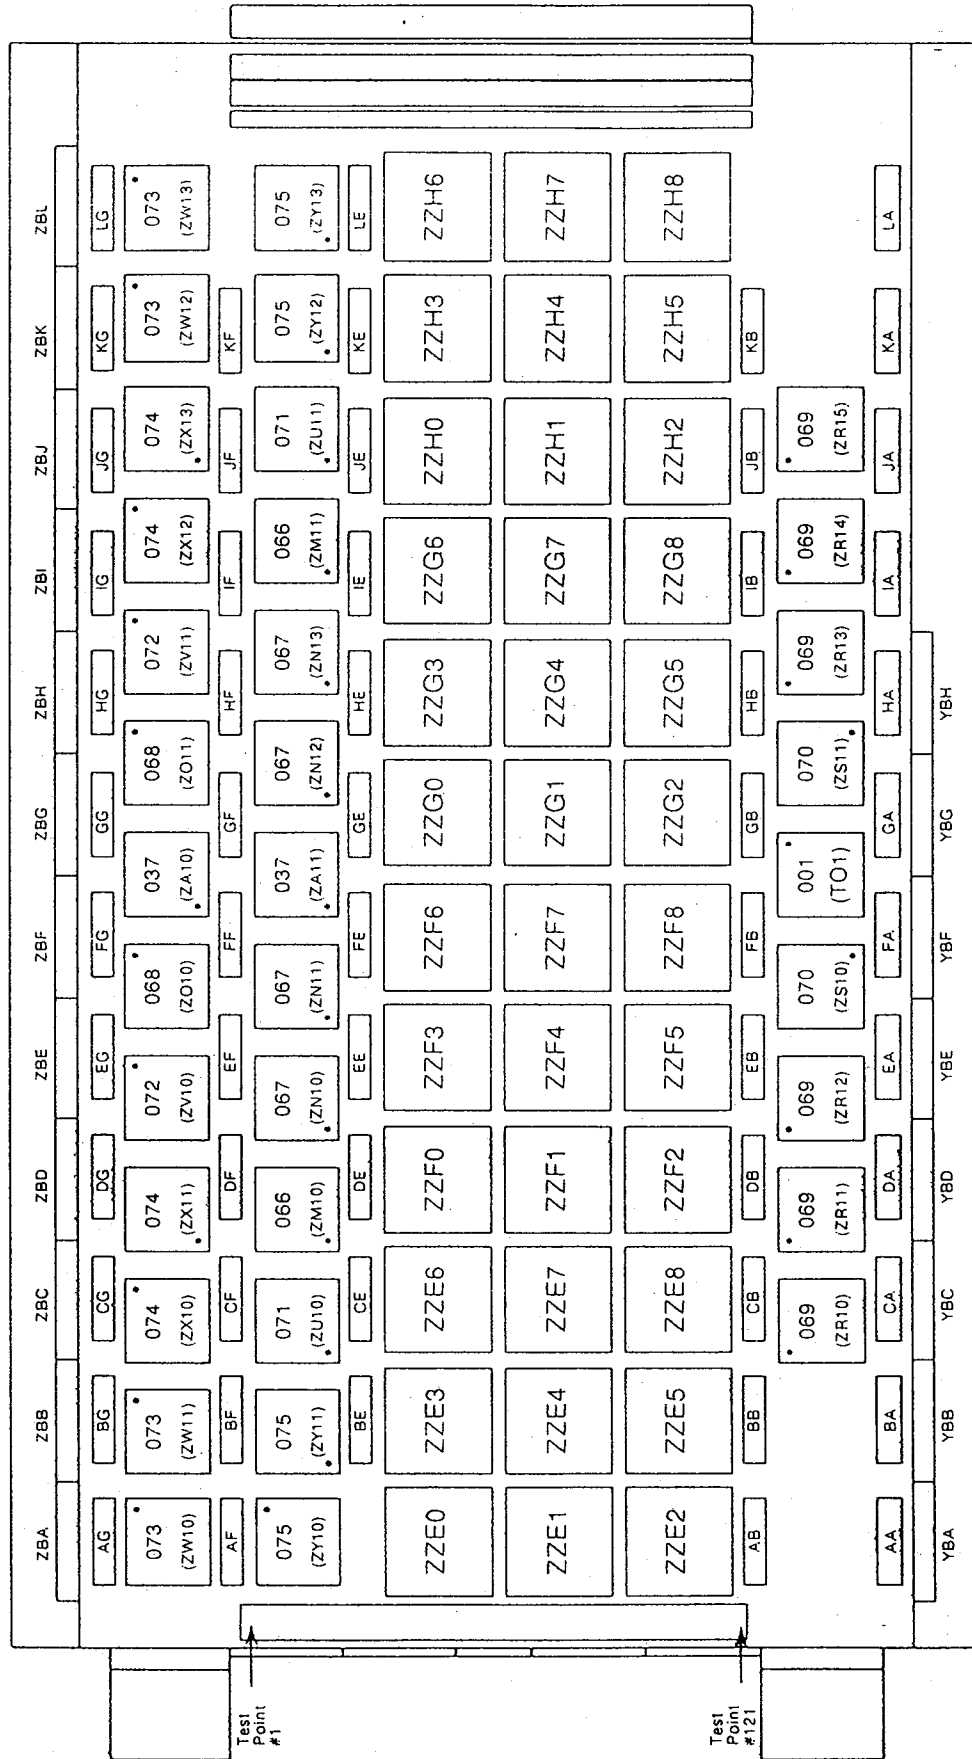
Sample of Memory Module Board A Layout (Sheet 1 of 4)
